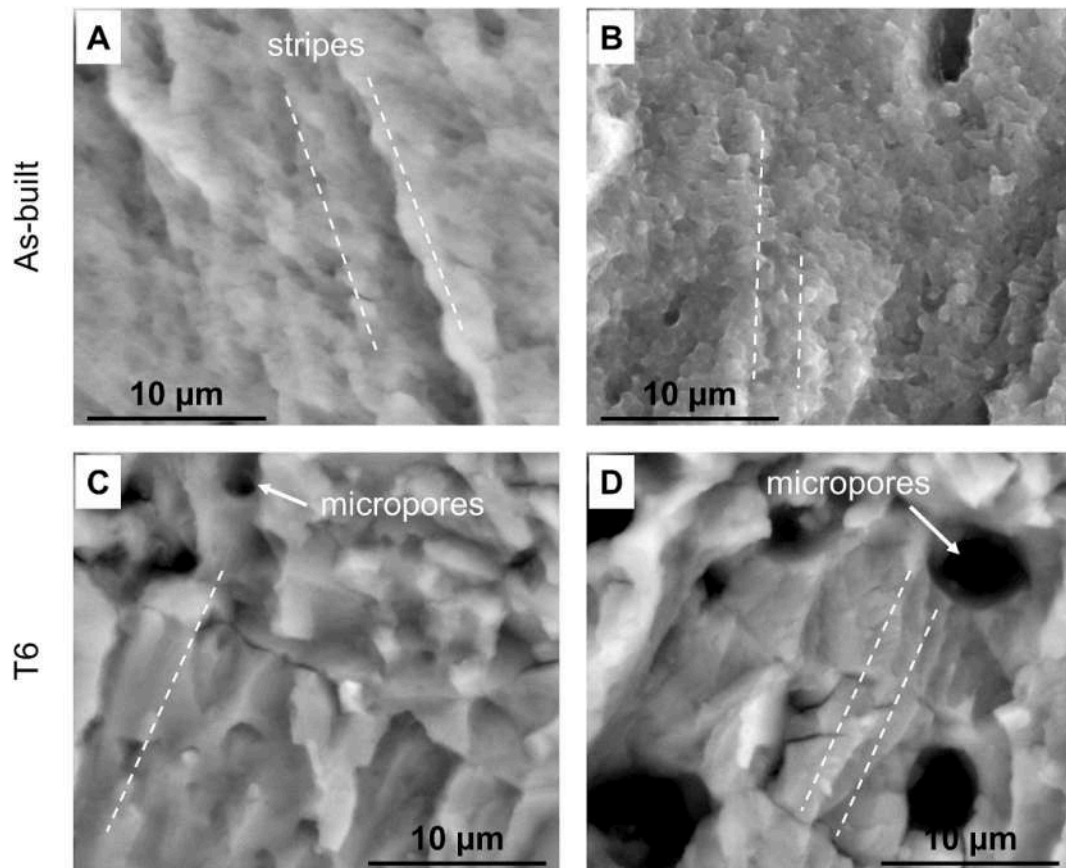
Fracture surfaces of “average samples”: second transition zone. A) XY-AB; B) Z-AB; C) XY-T6; D) Z-T6.
